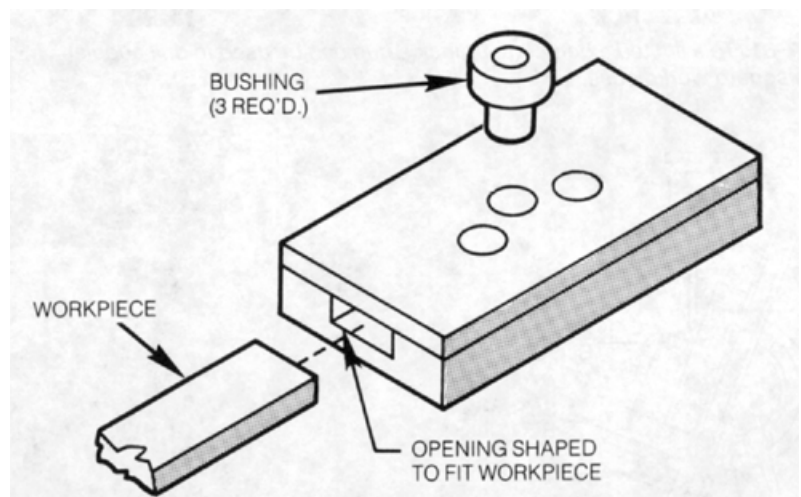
Another example of a hole locating setup. Bushings may be placed in drill guide holes to assure that holes will not become distorted by repetitive drilling. Bushings must be used when drilling metal.
